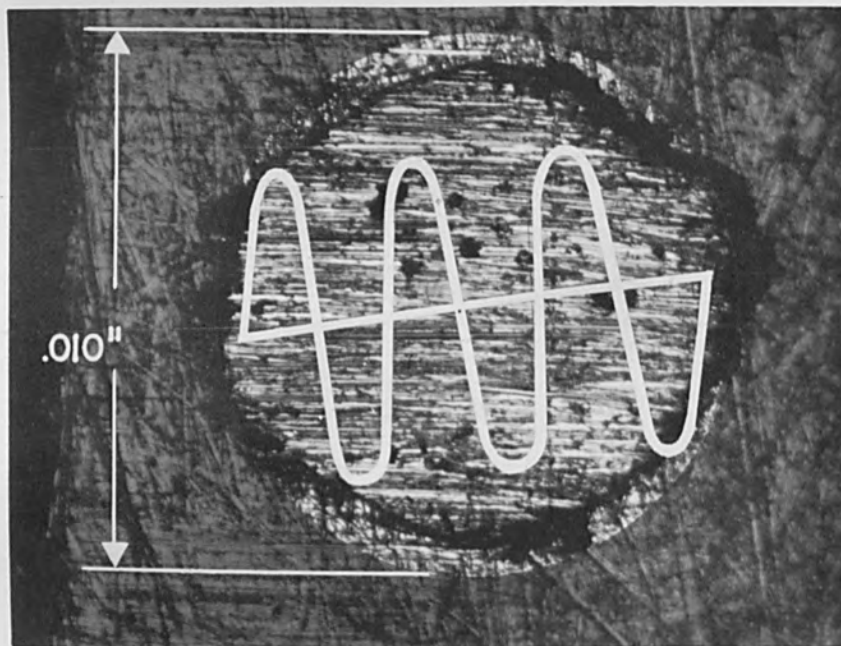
Electron Beam Weld Nugget Area 0.002-in. x 0.010-in. Copper Interconnector Welded to Nickel on Alumina
